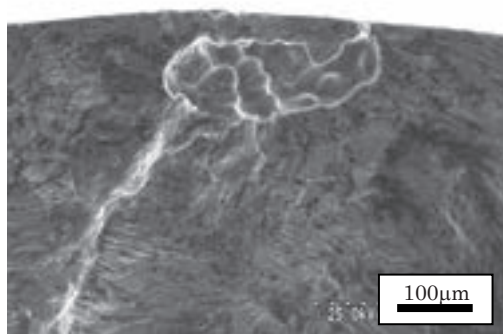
Example of a casting defect of AC4CH⁴).
